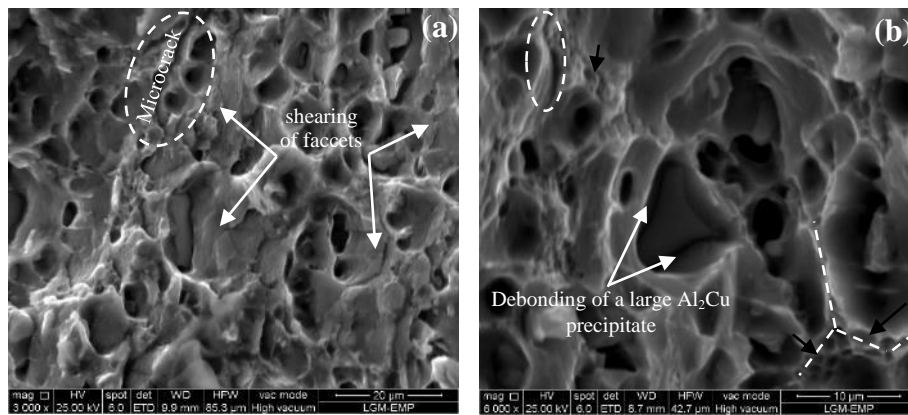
Fractography at higher Magnification indicates the mechanism of fracture.
